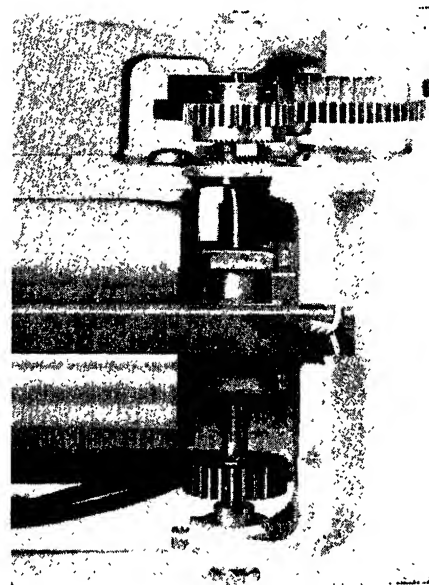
CAMERA AND CLOCK ASSEMBLY
